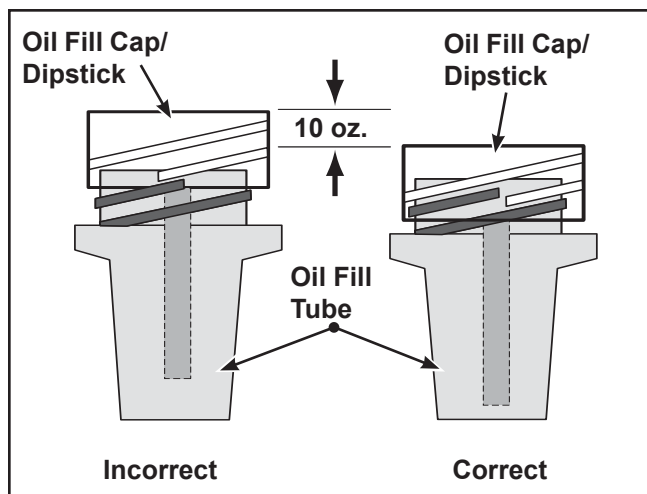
Oil Fill Cap and Oil Fill Tube Threads.
